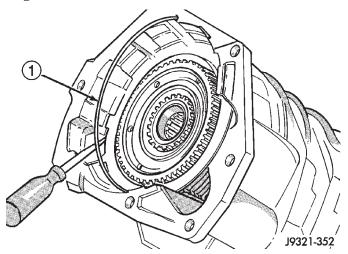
Overdrive Clutch Pack Retaining Ring Installation
